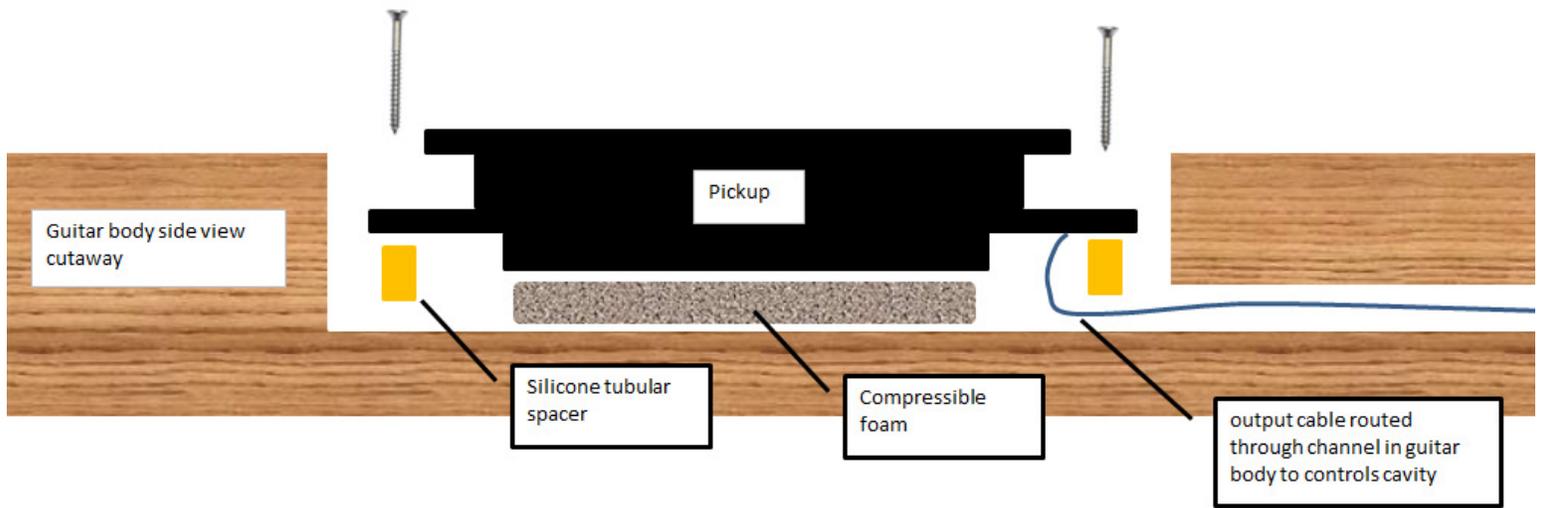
Cross section illustration of a pickup to be direct-mounted into a pickup cavity. One can use springs or silicon tubing under the bottom flange of the pickup at the location of the two mounting screws or compressible foam under the body of the pickup or one can use both. In some instances pickups are installed rigidly to the body of an instrument using neither springs or compressible foam; this hard mounting would require rigid shims under the pickups for height adjustment.
